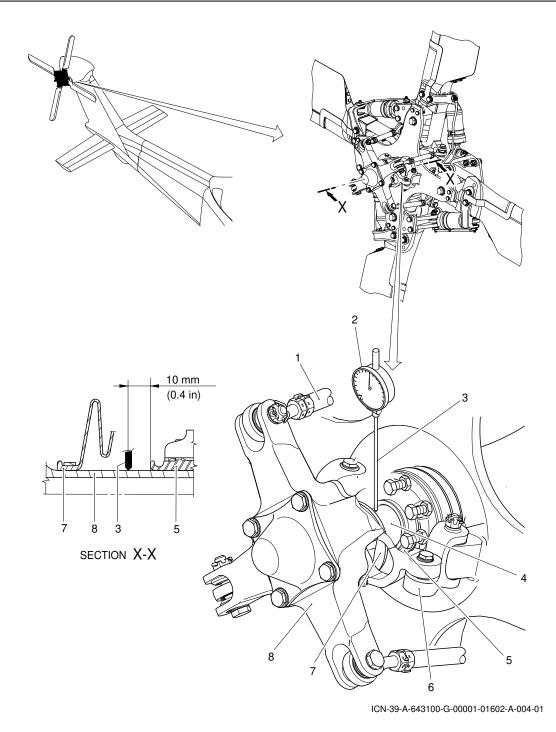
Rotating control installation - Slider bushing - Detailed inspection
